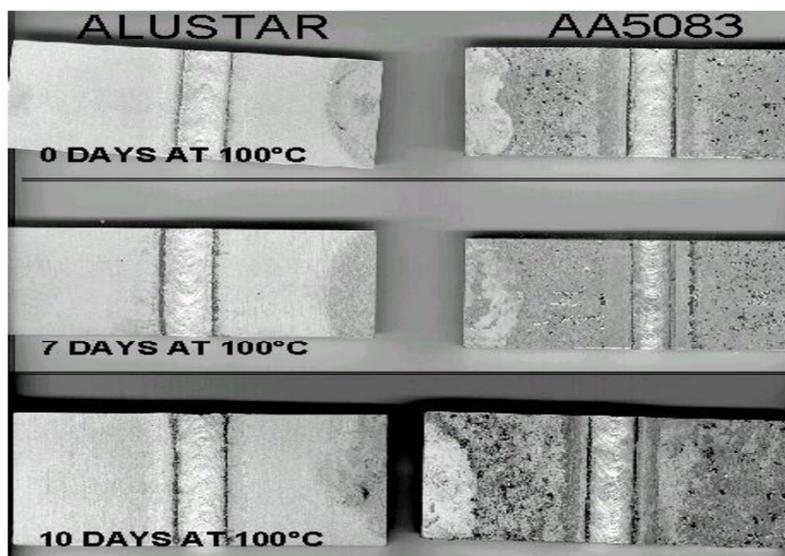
Surface of sensitized samples after the ASSET Test [25]
